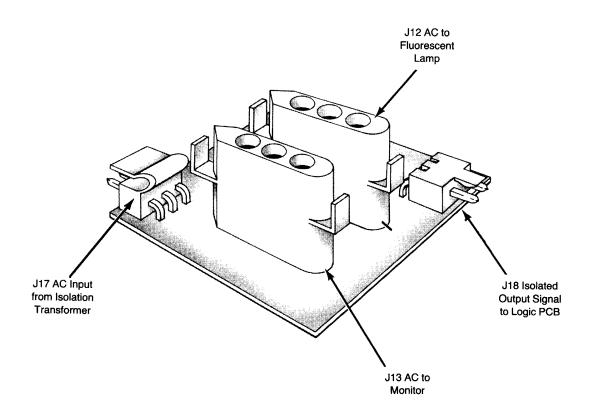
AC Sense PCB Assembly (006-8006-10-0A)
